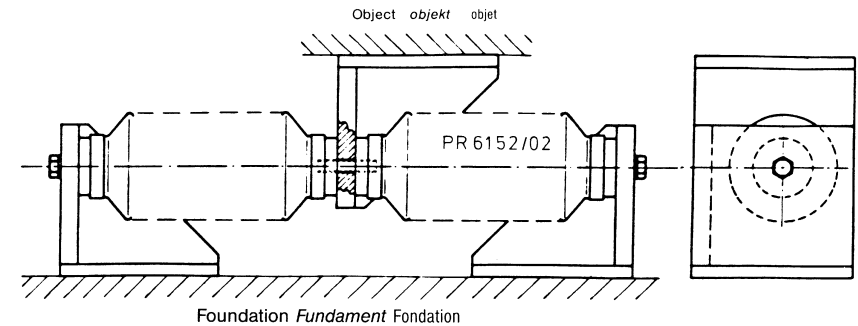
Mounting example for horizontal constrainer PR 6152/02
